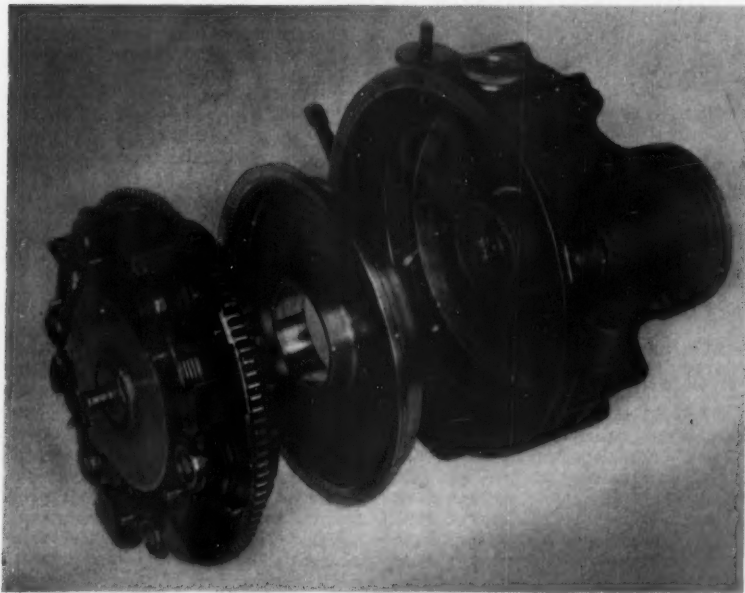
The main components of a Beier automobile type gear, showing how they fit into a flywheel casing
